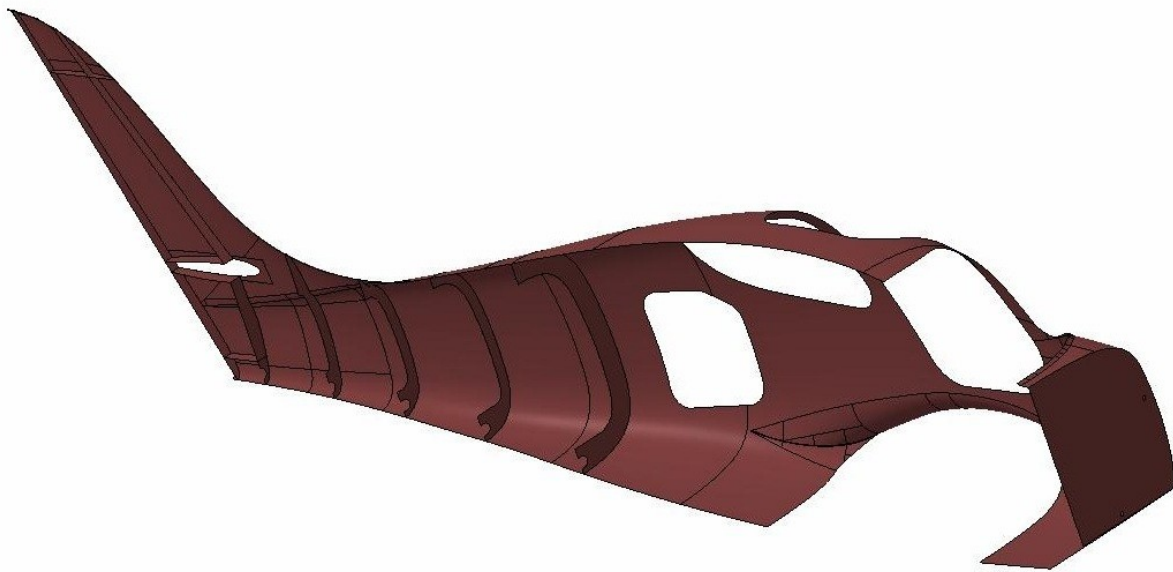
Bulkheads, horizontal tail attachment and tail ribs inside the fuselage
